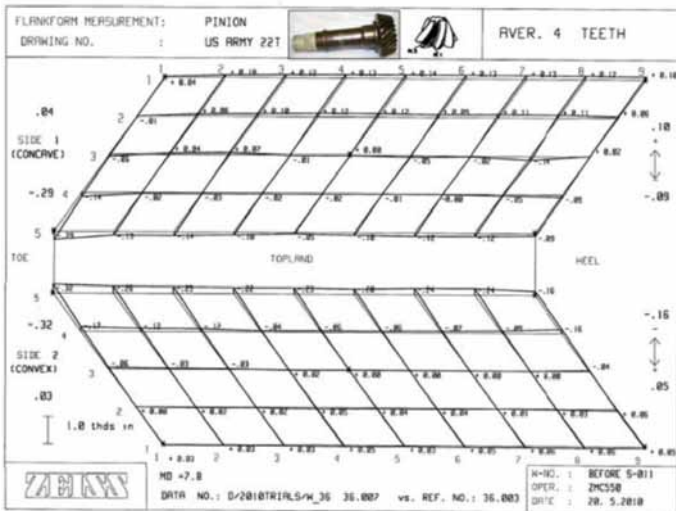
TTO bevel pinion A518-00011 flank form analysis after final MMP treatment.
